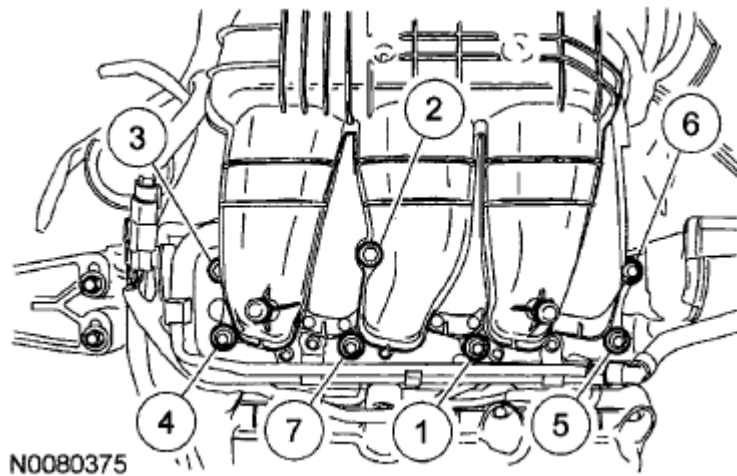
Identifying Upper Intake Manifold Bolts In Sequence
